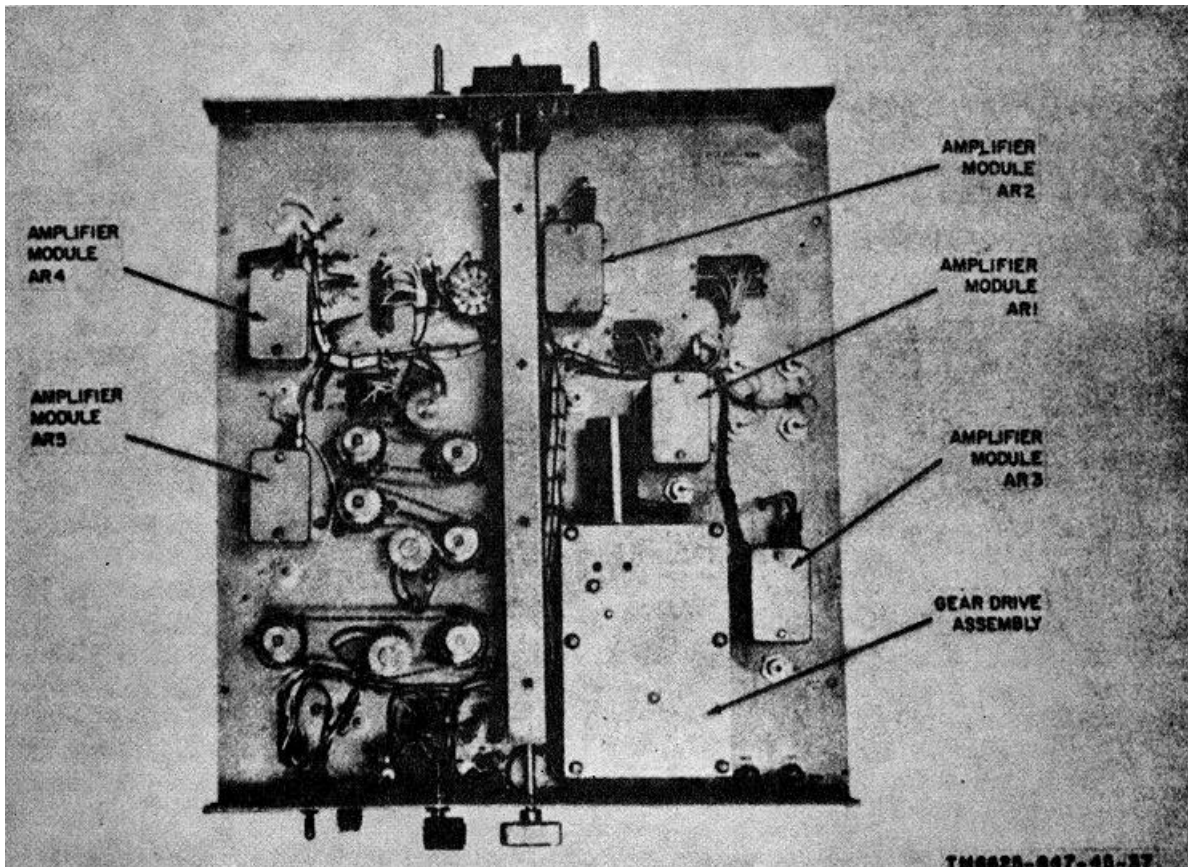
Synthesizer test to A1A3, module and subassemblies locations.
